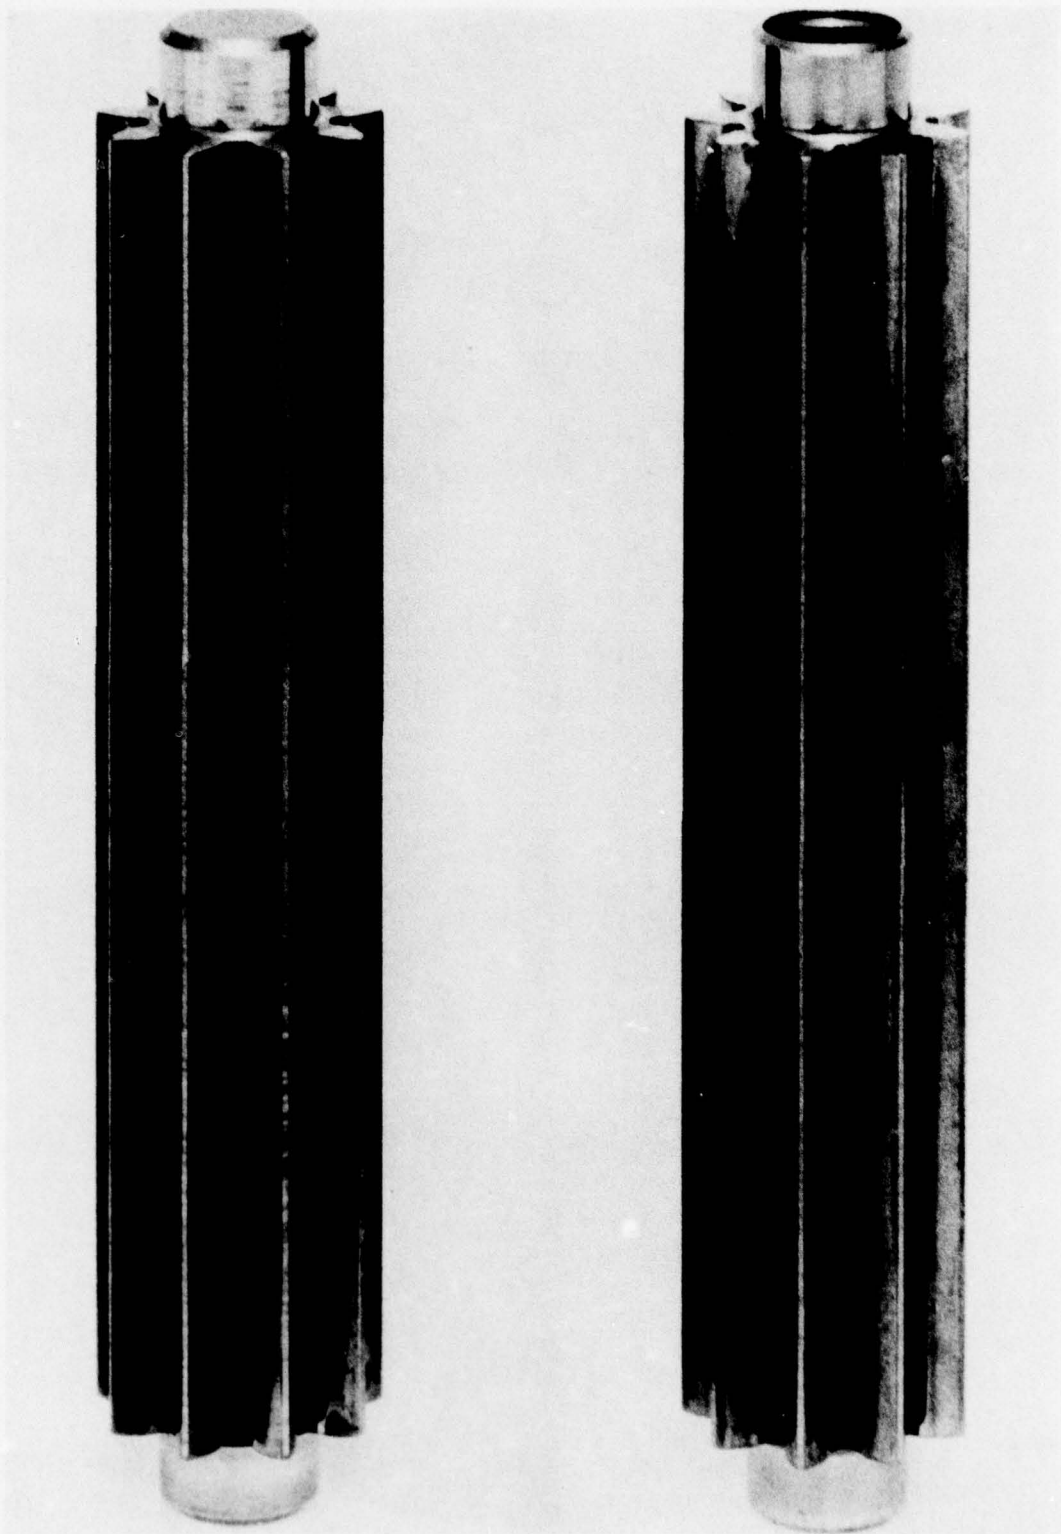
Supply Pump Gearshafts, Drive End Supply Package
